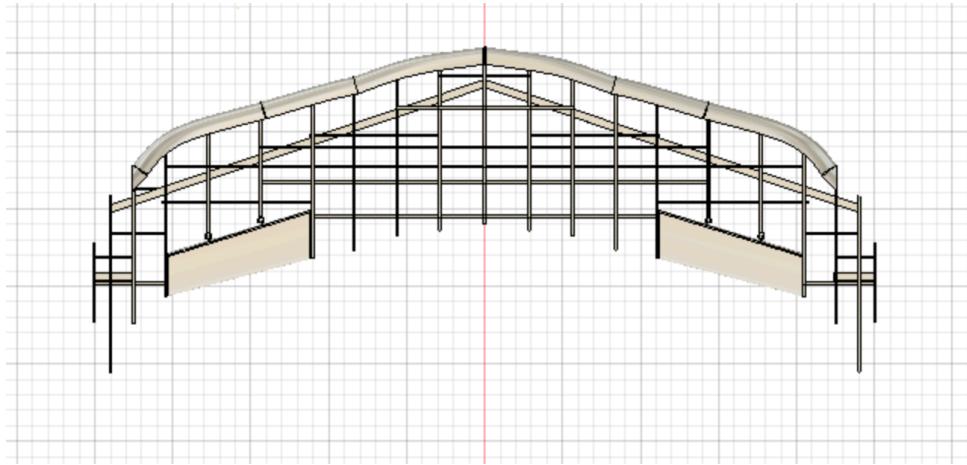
Fuselage Member Section. Cut Out to Fit onto the Wing Ribs.
